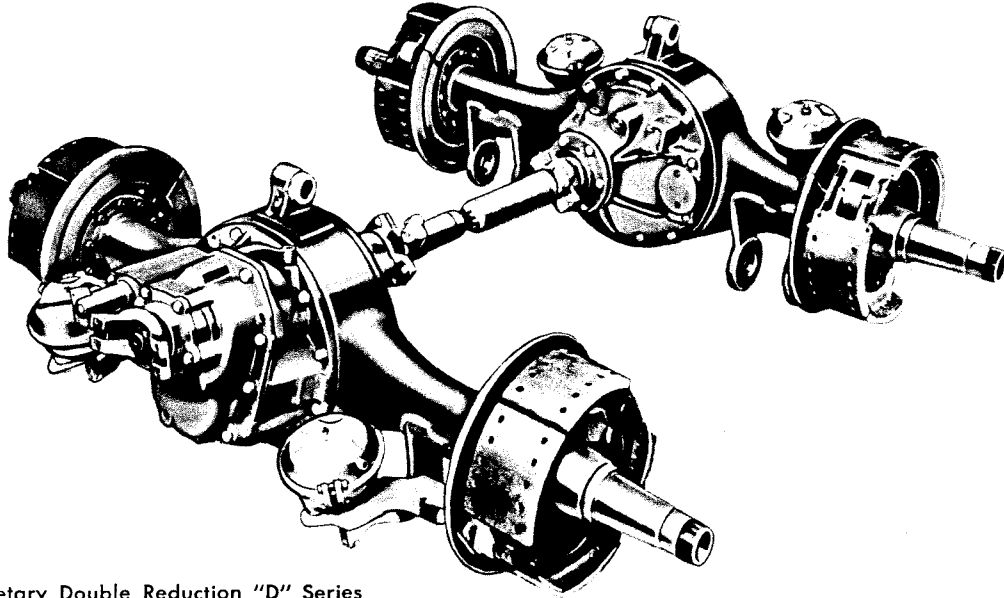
Planetary Double Reduction "D" Series Tandem Drive Axle Assembly.
